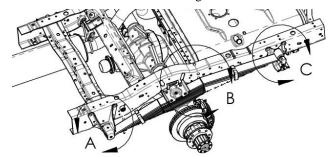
Rivet removal locations. Driver side shown. Remove rivets on passenger side also.
